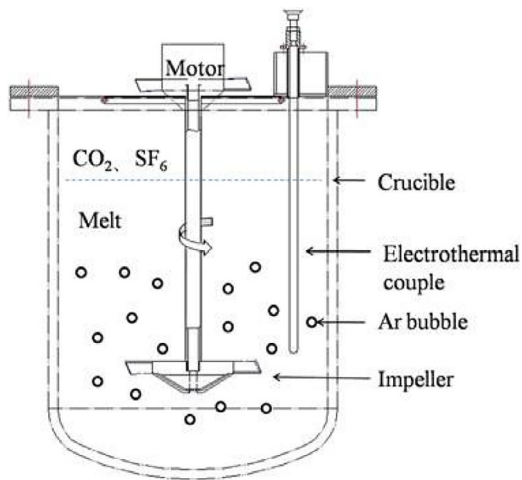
Schematic drawing of rotating impeller gas bubbling system [51].
